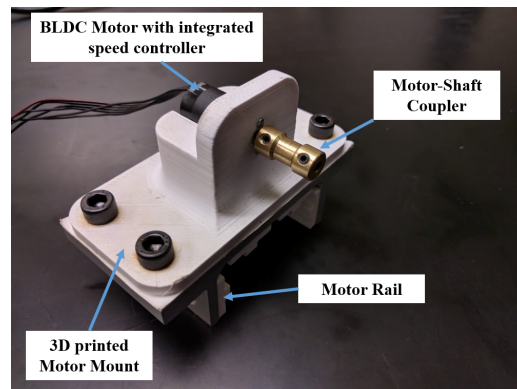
BLDC Motor with rigid shaft coupler housed in a 3D printed mount
